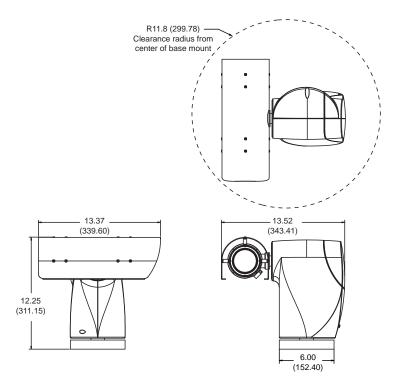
Dimensions, 5970^{sD}, for Camera with 100 mm lens. Dimensions in inches (mm)
